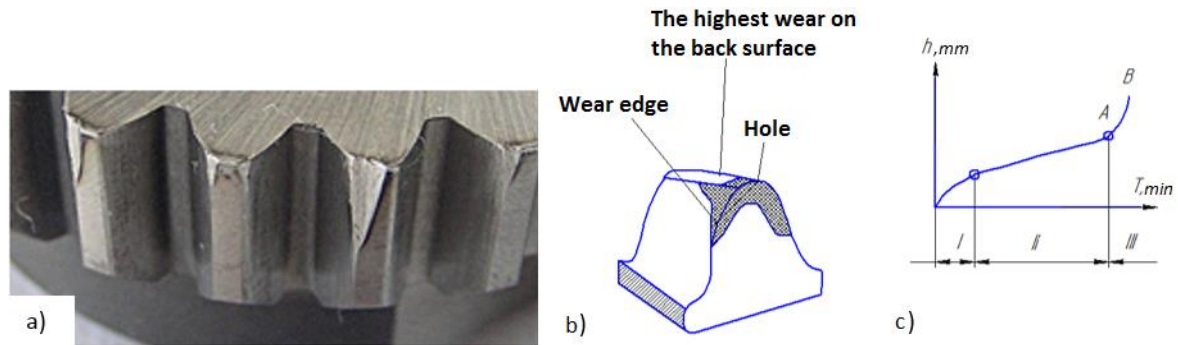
Wear a gear-cutting: (a) – catastrophic wear of the teeth of a slotting tool; (b) – the nature of the tooth wear; (c) – dependence of wear on the tool life.
